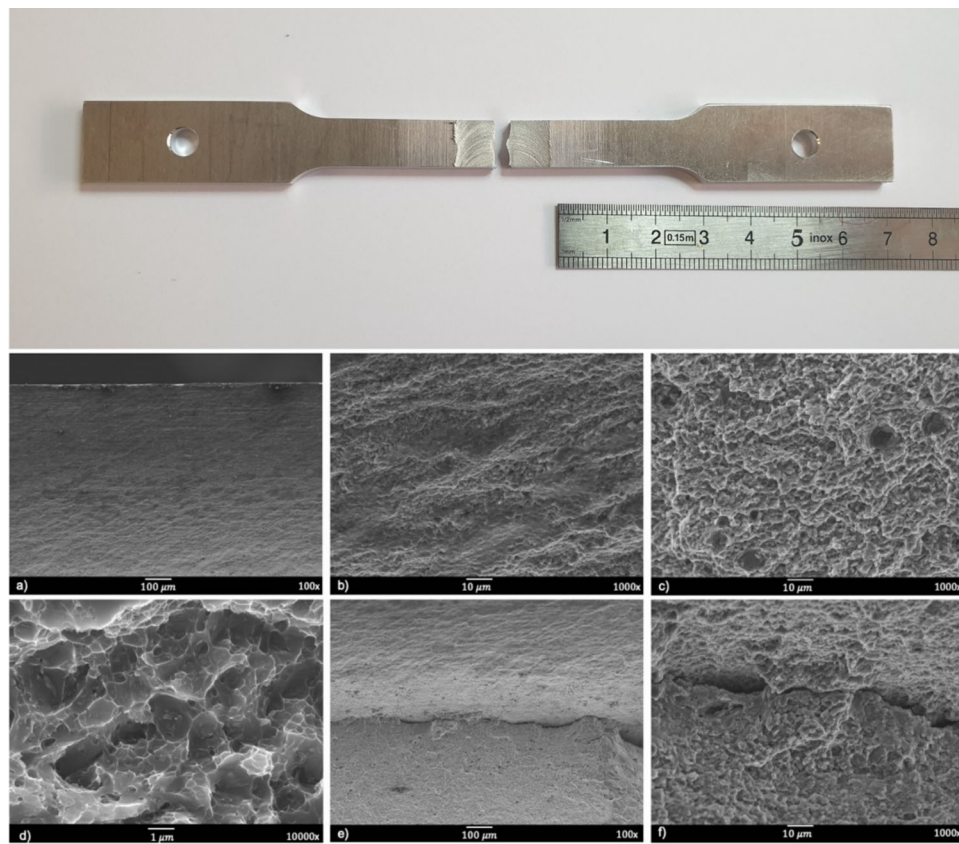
Fractographies of a specimen tested with $R = 0.05$ and $T = 23\text{ }^{\circ}\text{C}$: a) crack initiation region, b) final fracture region, c) final fracture regions showing dimples, d) detail of c), e) secondary cracking, f) detail of e).
